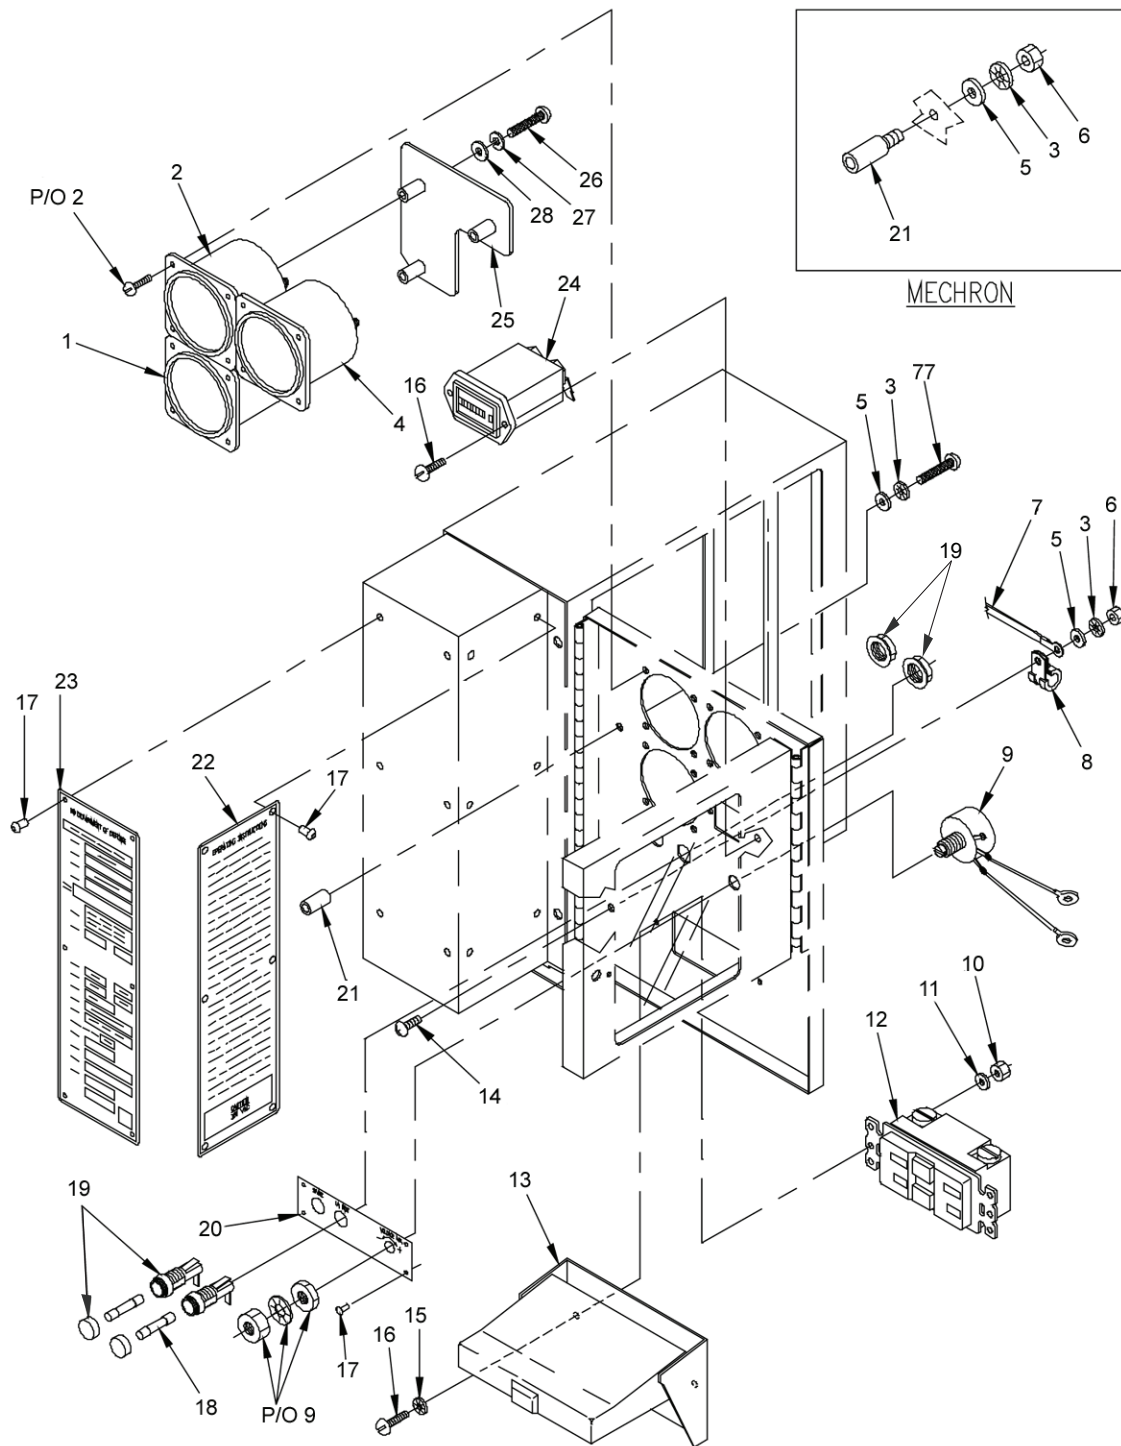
Control Panel Assembly (MEP-531A) (Sheet 1 of 3).
